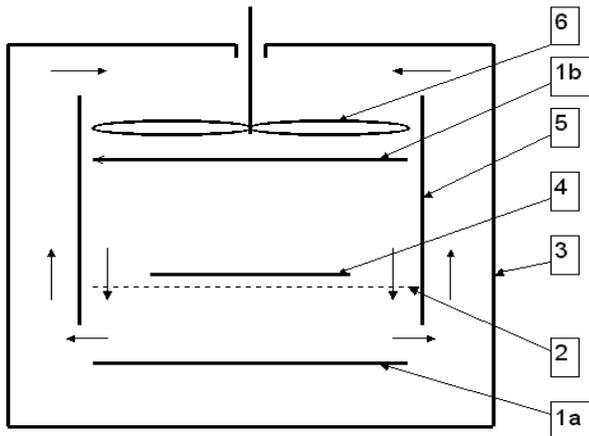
Cross-section view of an experimental soldering machine: 1a and 1b – heaters; 2 – grid, 3 – heating chamber; 4 – PCB; 5 – reflecting screens; 6 – fan.
